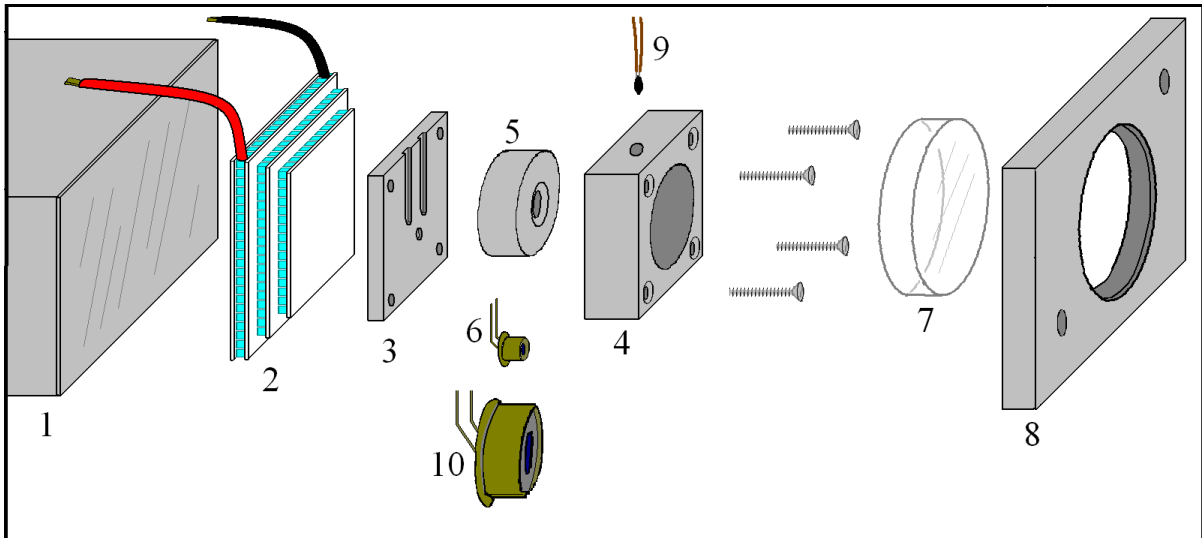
An exploded view diagram showing the APD mounting configuration. A brief description of the parts:
